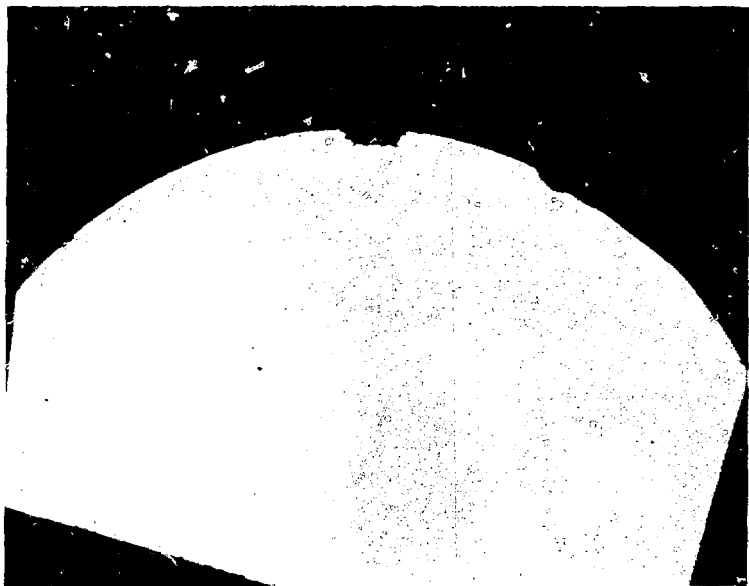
Moore diamond tool #E-4. (a) Top view, 121X.
